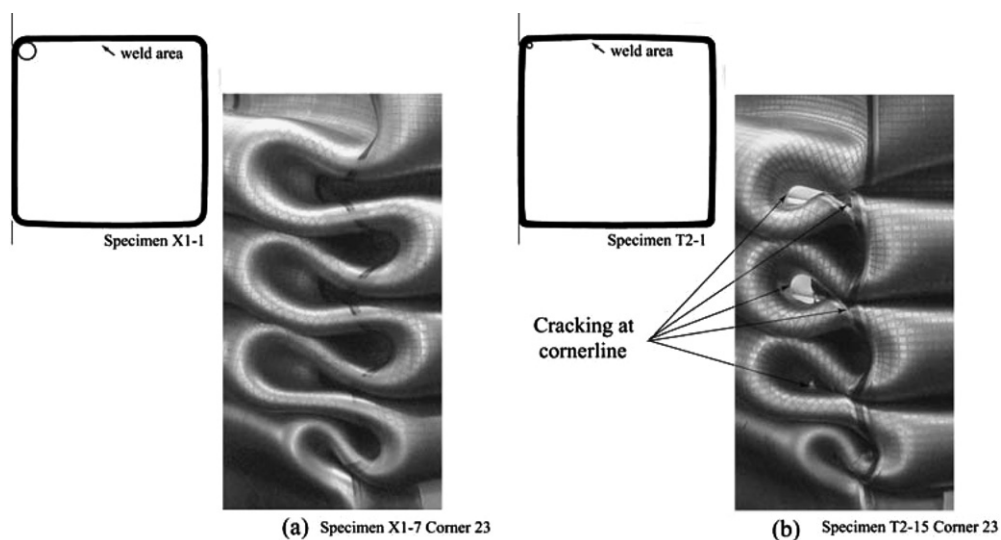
Geometry and fold formation response differences for 316SS tube lengths: (a) tube length X1 specimen and (b) tube length T2 specimen.
